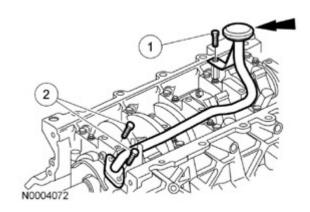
Locating Oil Pump Screen Courtesy of FORD MOTOR CO.
